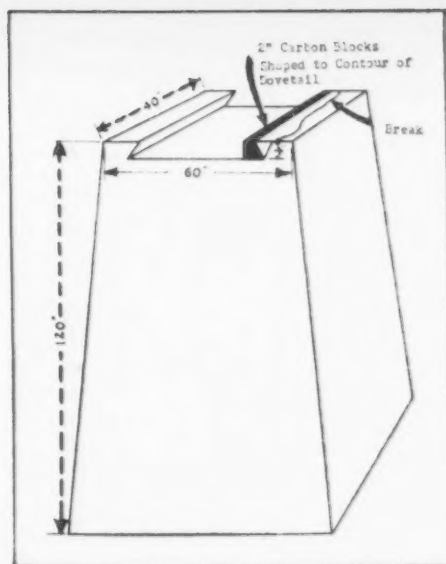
Using a carbon block shaped to the contour of the dovetail of this 60 ton forging hammer anvil base, the break shown was repaired by fusion welding.
